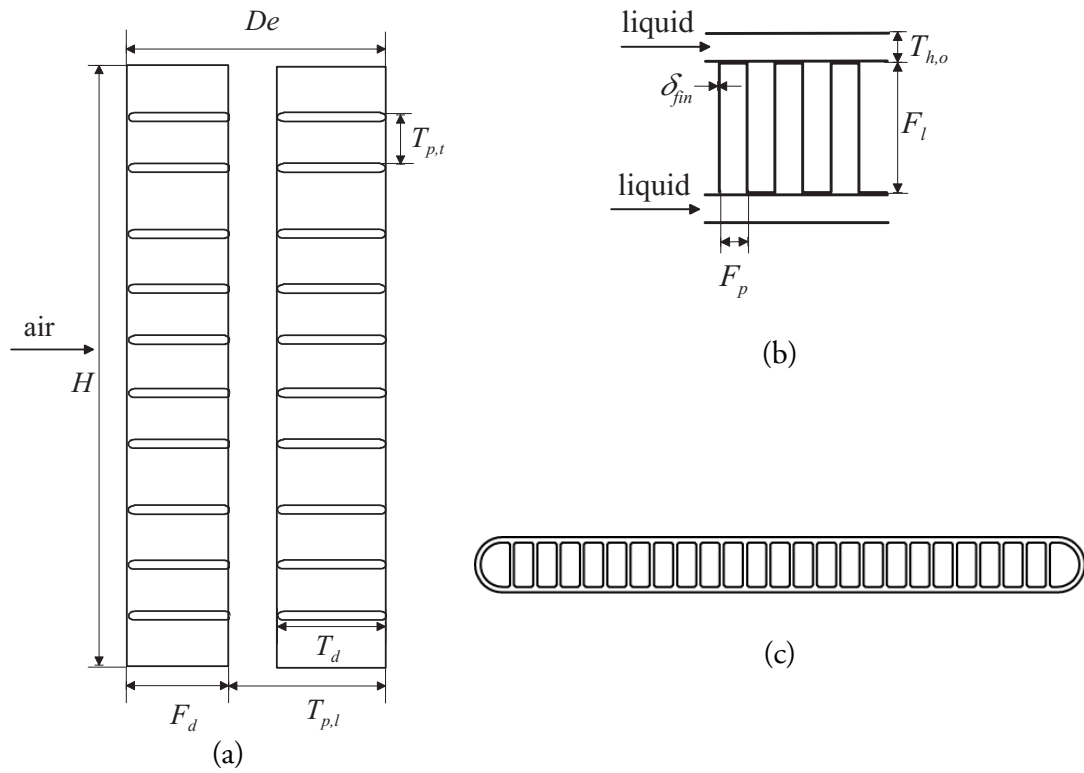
Schematic drawing and nomenclature of the multiport extruded tube heat exchanger denoted MPET-HE (Paper IV) (a) view of cross-section, (b) serpentine fin geometry, (c) cross-section of MPE tube.
